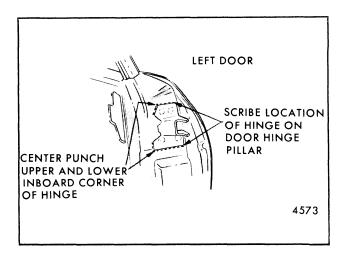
Locating Hinge on Door Hinge Pillar
